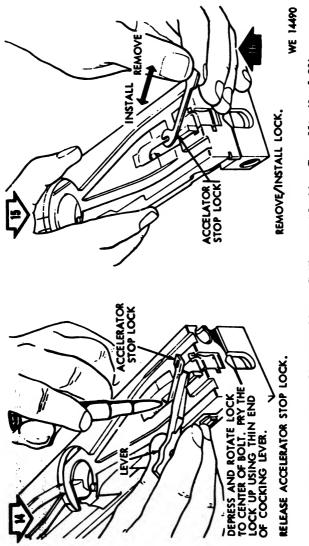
Disassembly/assembly of Caliber .50 Machine Gun, M2. (6 of 20)
